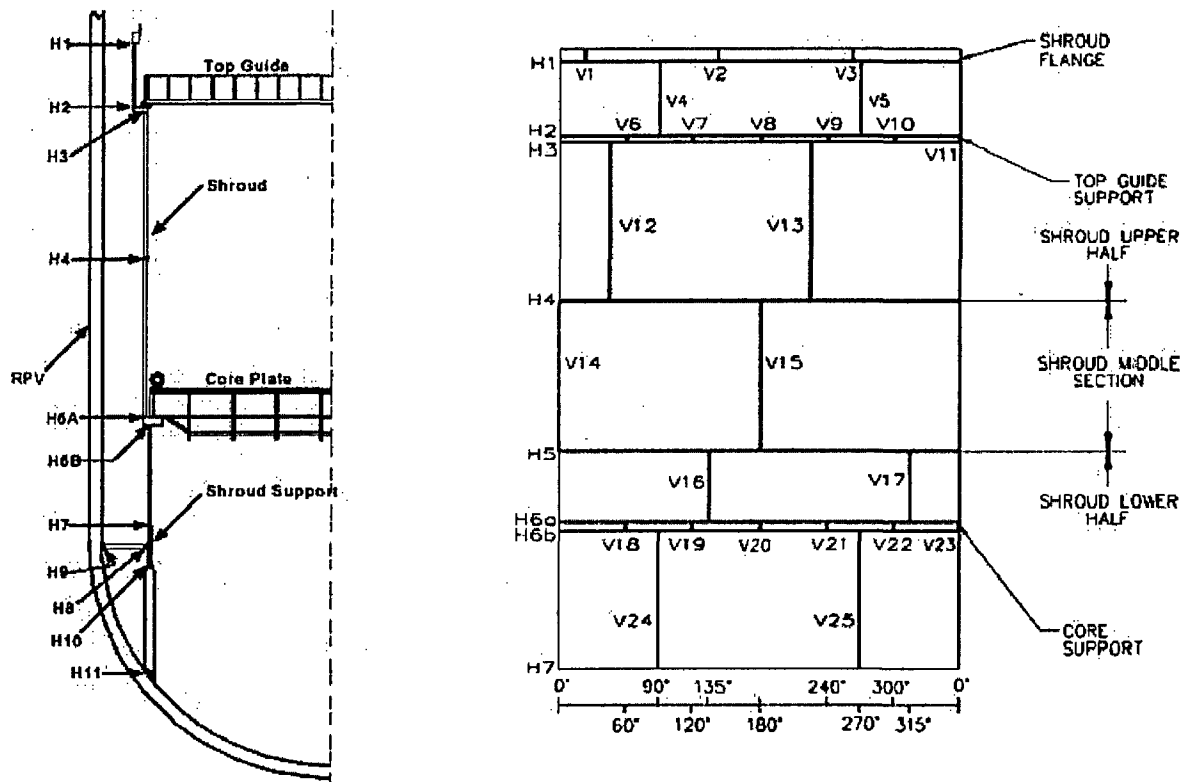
Sketch of Shroud with Typical Weld Locations
